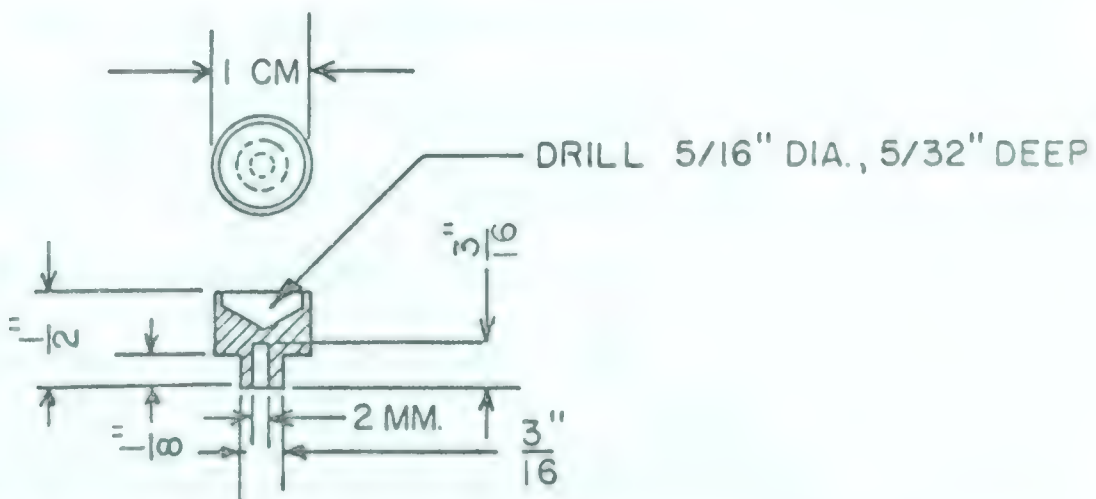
(a). Assembly drawing of electron bombardment apparatus.
